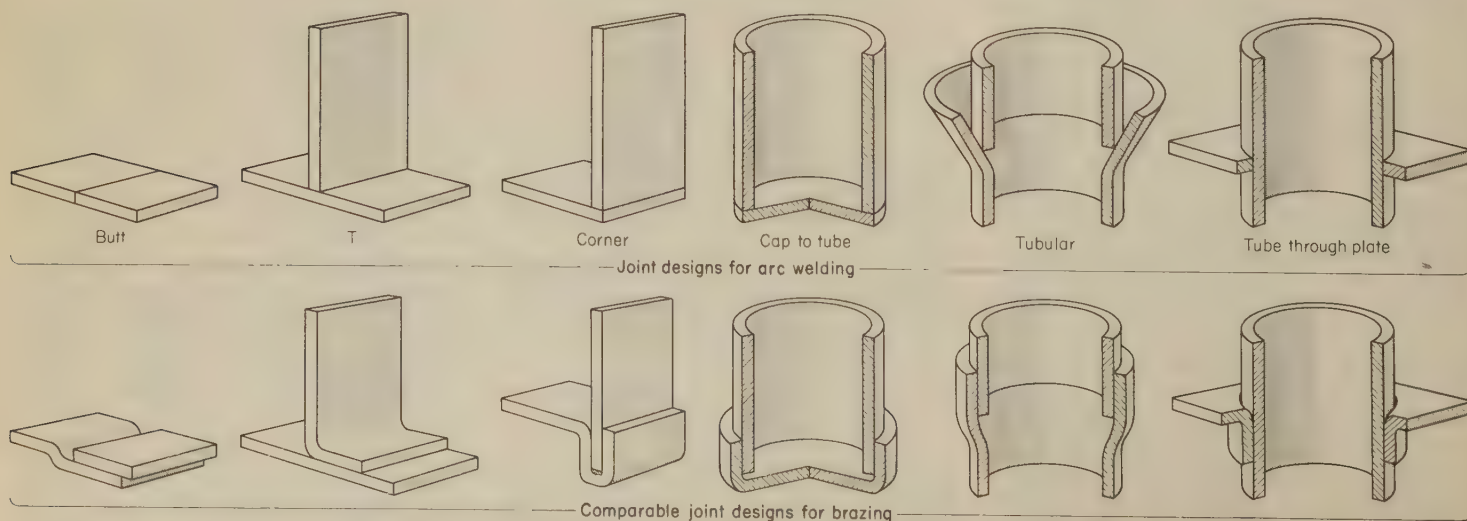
Comparison of joint designs commonly used in arc welding and comparable designs used in brazing (H. R. Brooker and E. V. Beatson)
